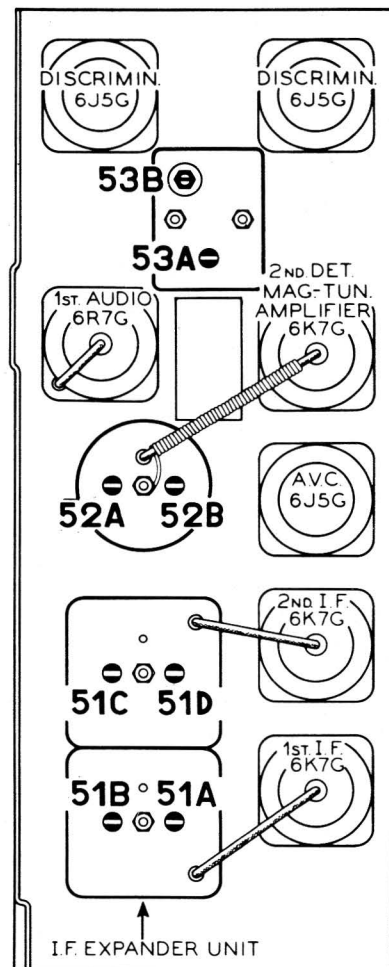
Top View of I. F. Unit Showing Compensator Locations
